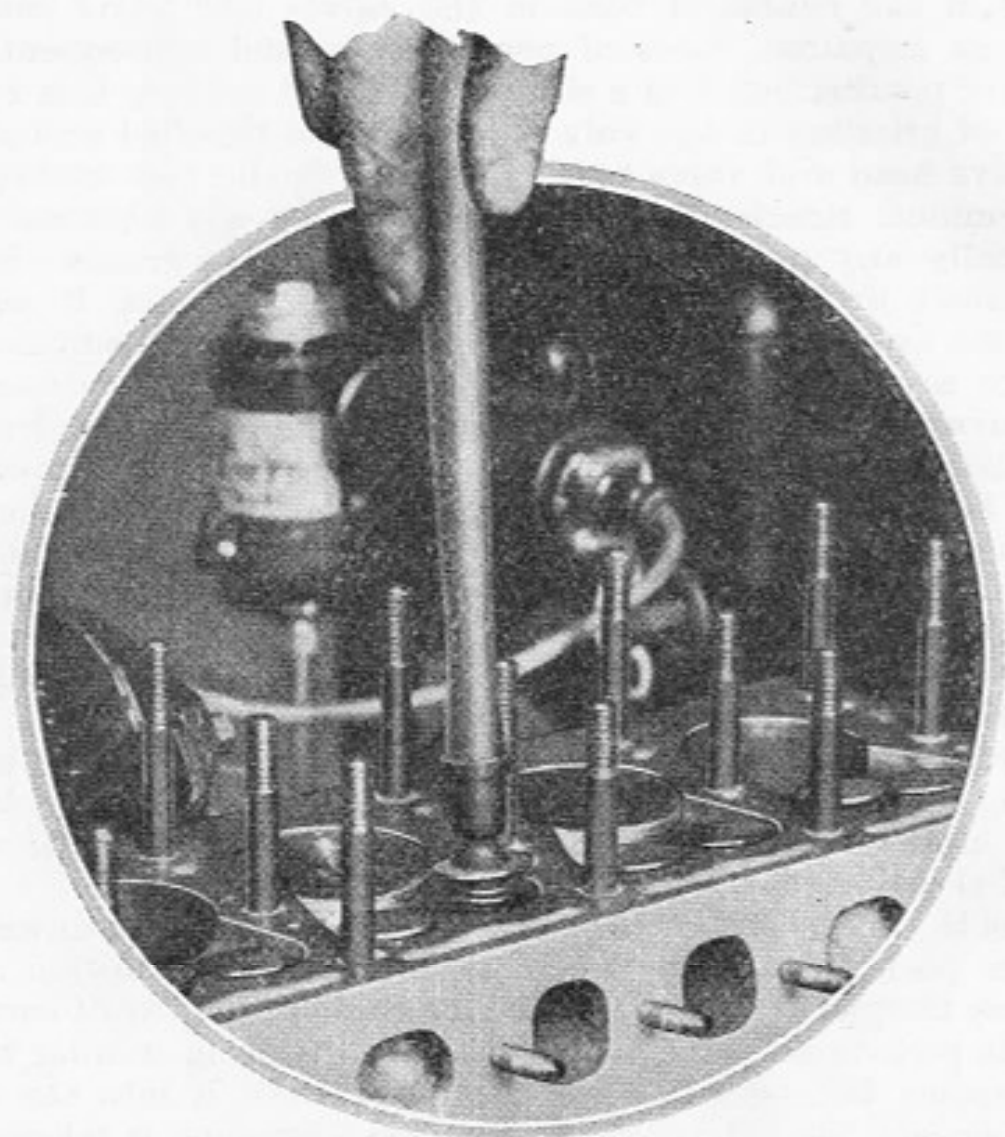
A COIL SPRING PLACED UNDER THE VALVE
